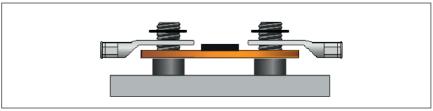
HV BM 1.2+S, placing ring terminals and washers on the threaded bolts
